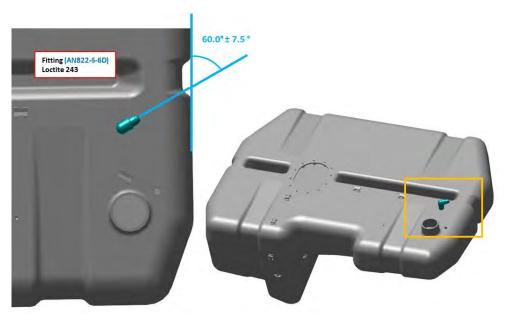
3/8 FLARED TUBE ELBOW FITTING INSTALLATION
